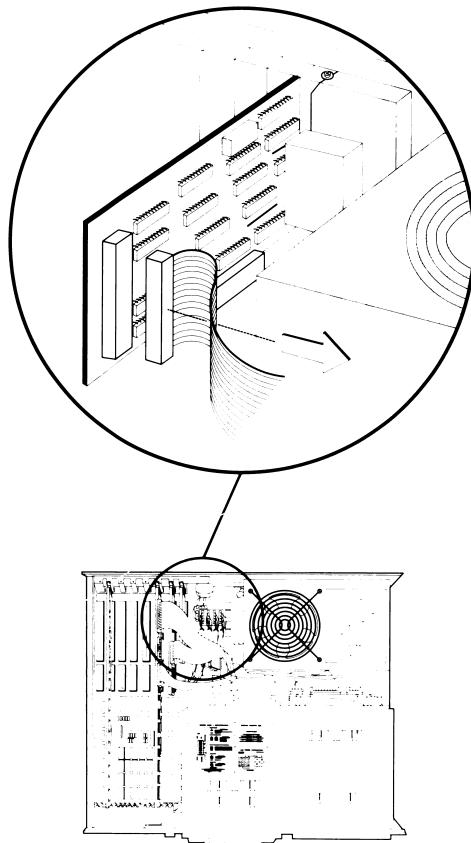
Removing the Host Adapter Controller Board Signal Cable.
